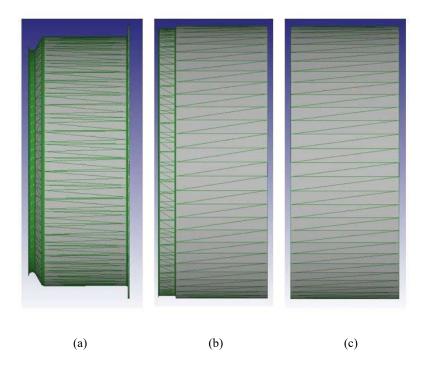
(a) grooved top roller, (b) grooved bottom roller till penultimate pass, (c) final bottom roller
